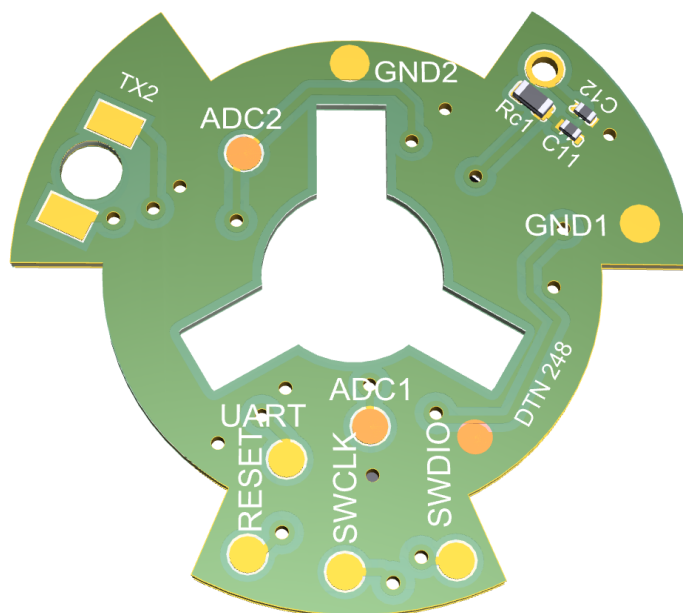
Bottom 3D view of version 2 PCB of OMP
